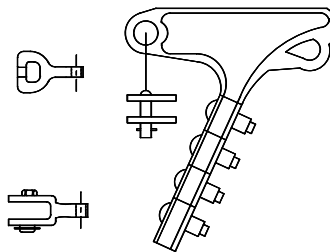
TYPICAL BOLTED DEADEND CLAMP
